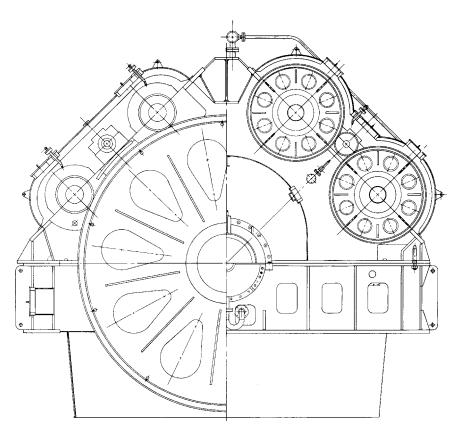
End cross section, typical locked-train reduction gear. (Source: Demag Delaval.)
